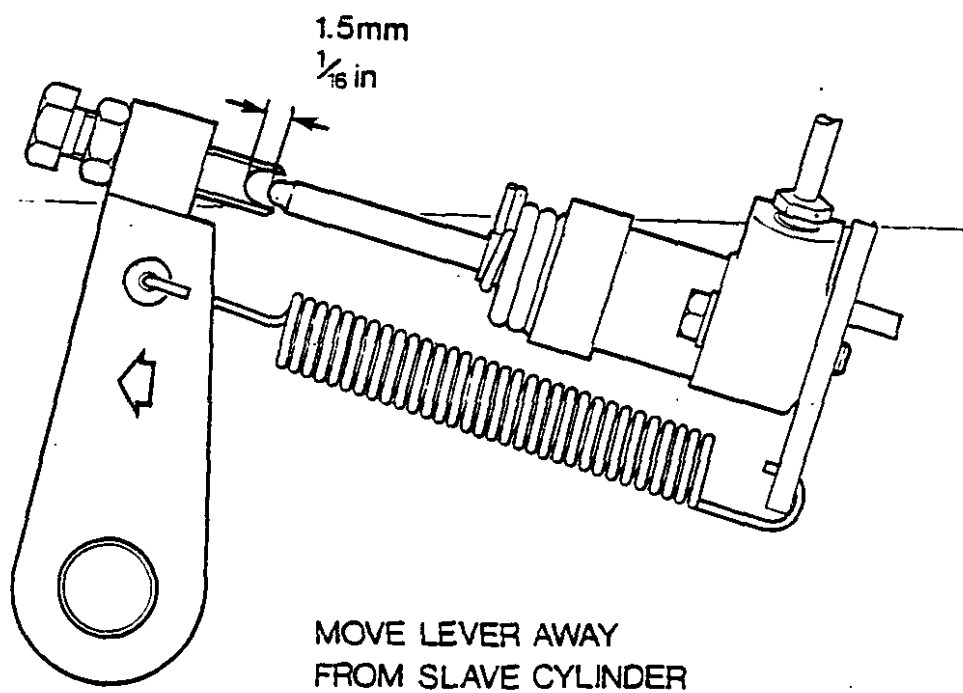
990, 995 CLUTCH SLAVE CYLINDER
